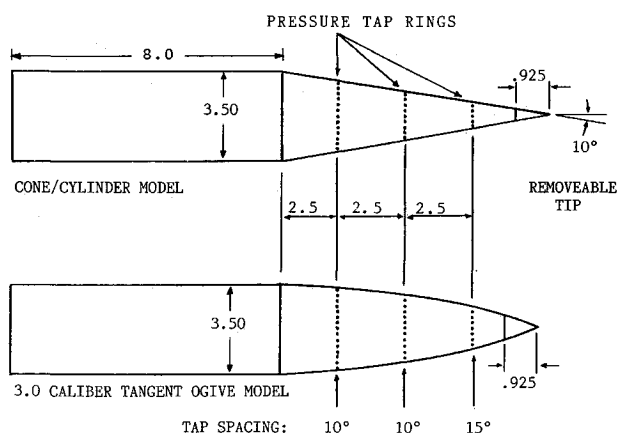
Sketch of model geometry and pressure tap locations (dimensions in inches).
